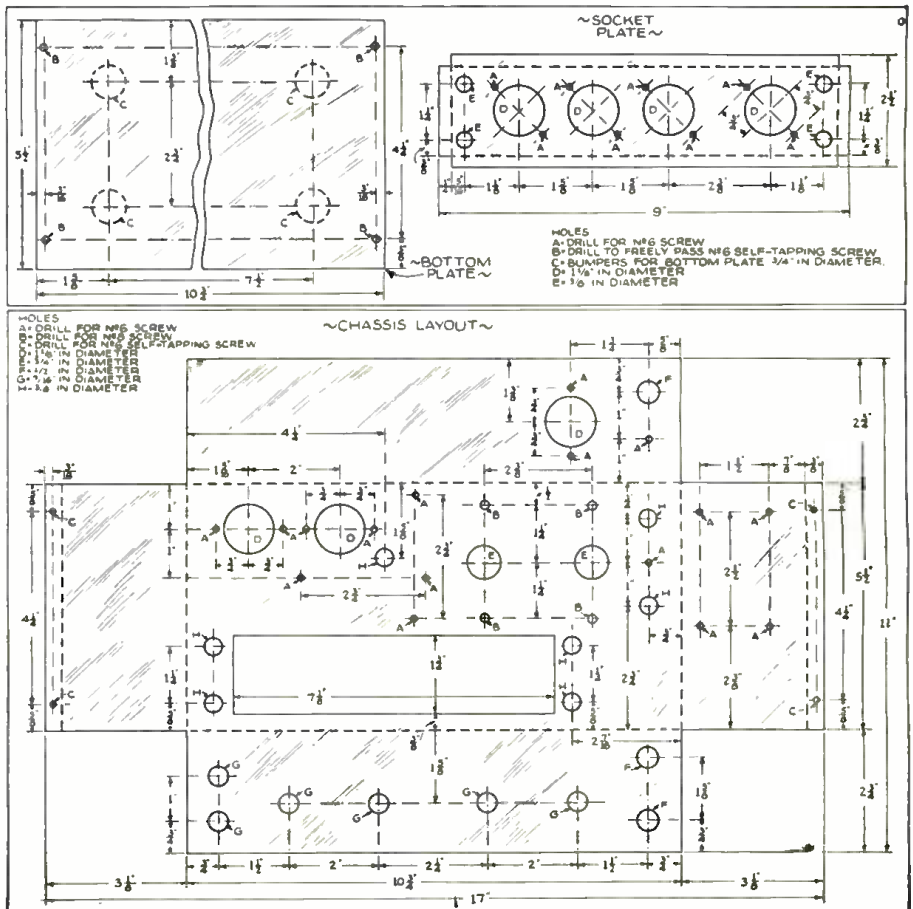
Complete specifications for cutting and drilling the chassis, tube plate and bottom cover for the 5-W. versatile amplifier.
